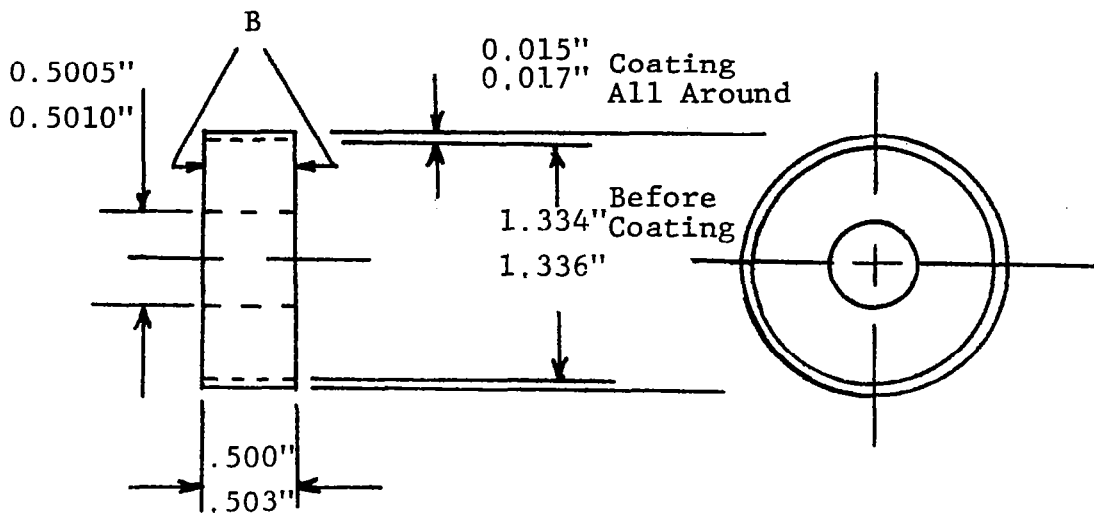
Ring Specimen for NASA Line-Contract Rub Shoe Wear Test Machine
